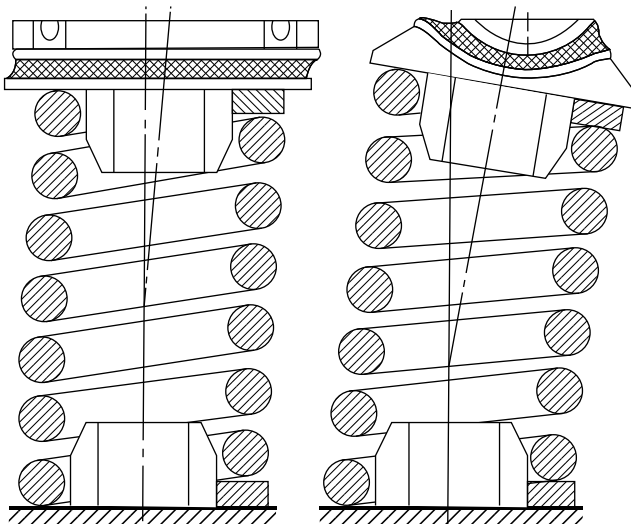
Spring resting on rubber-metal cylindrical joints.
